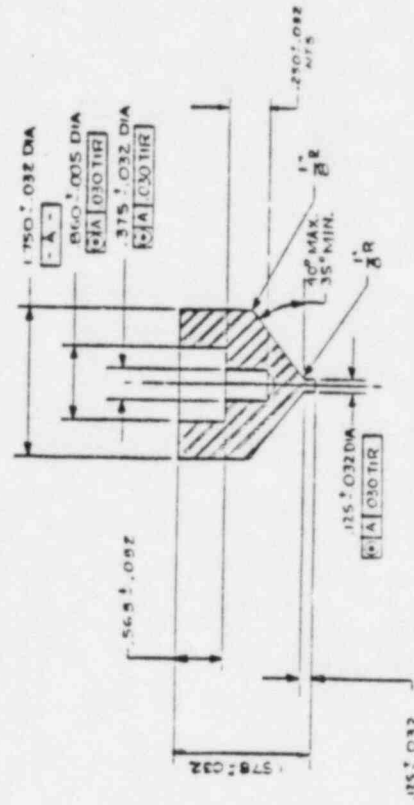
SPECIAL WELDING BOSS (SWB)
